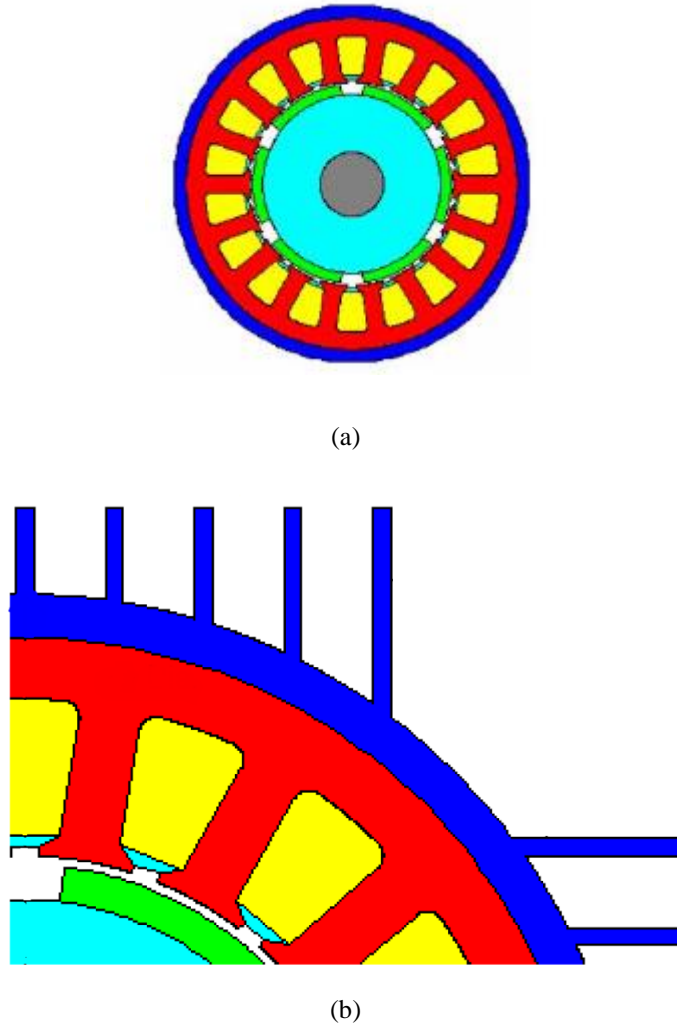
2. Electric machine housings for natural convection cooling, (a) smooth housing, (b) housing with perpendicular fins [27, 28].
